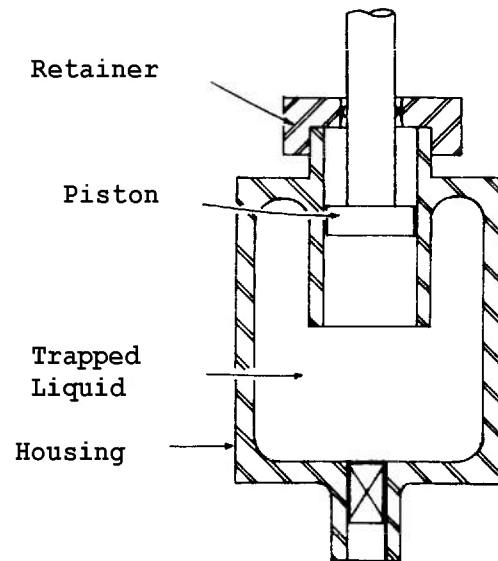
Liquid Spring or Dashpot (Ref. 63).
